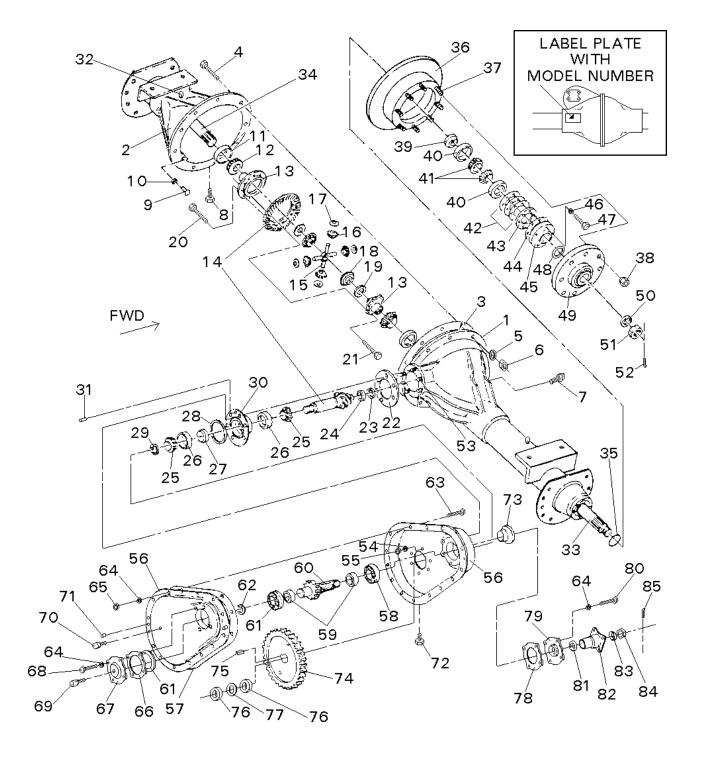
Rockwell Drive Axle and Reduction Gear Assembly
